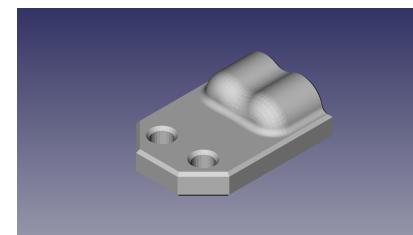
Begonia 3D Printed Cable Carrier Mount Render
